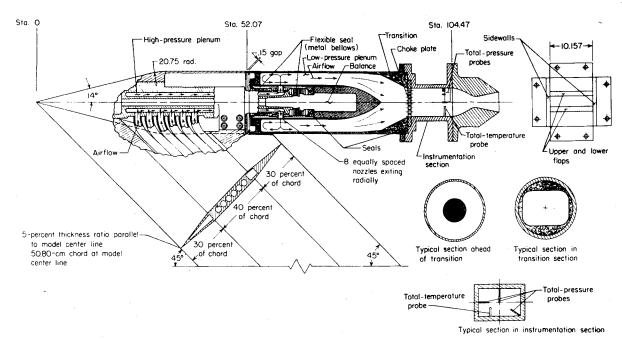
Typical 2D-CD nozzle installed on the NASA Langley Research Center 16-ft Transonic Wind Tunnel Jet Exit Facility.
